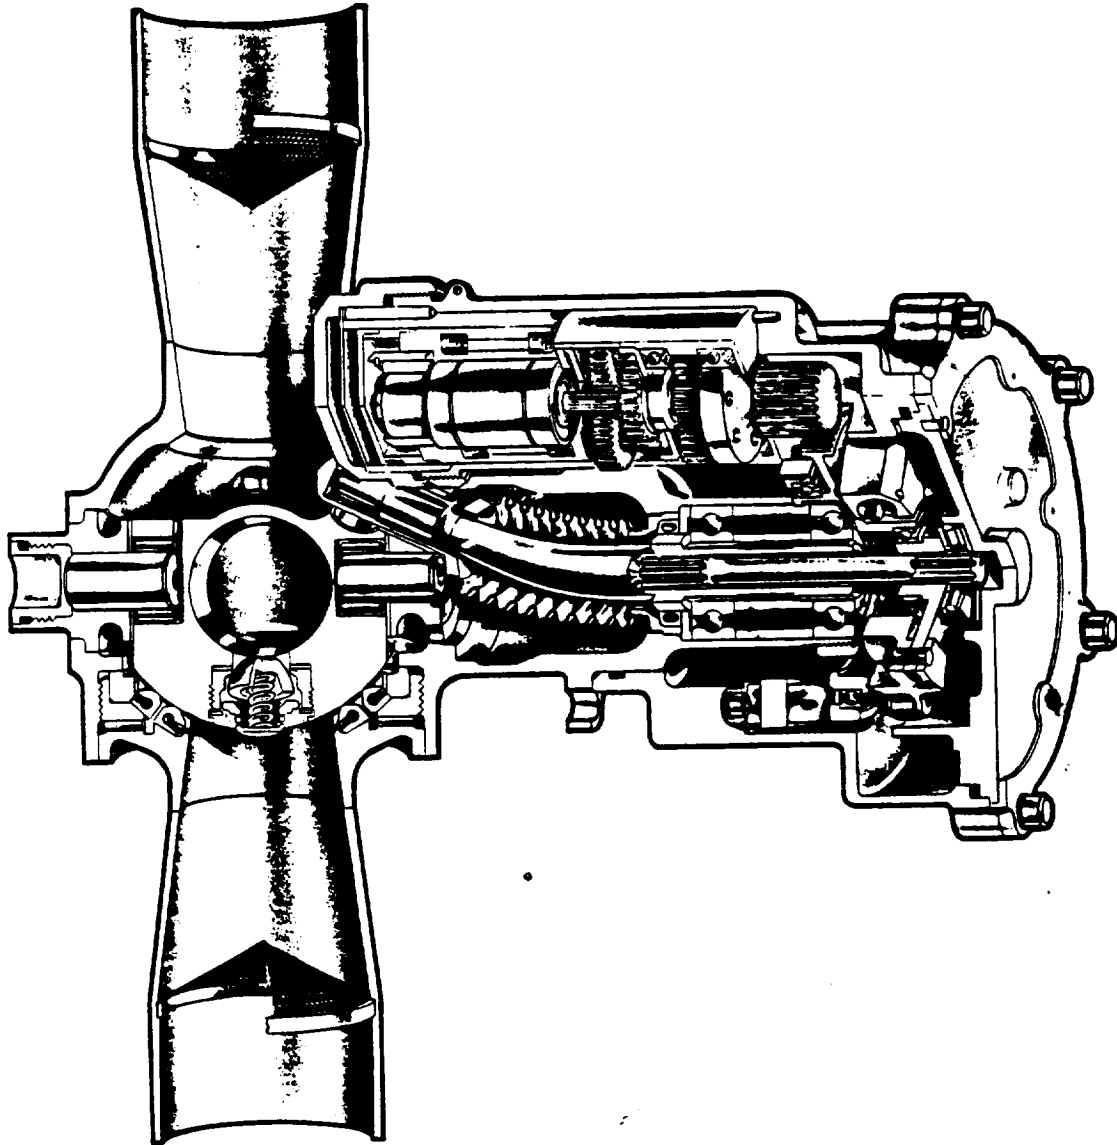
A/C MOTOR VALVE CROSS SECTION.
